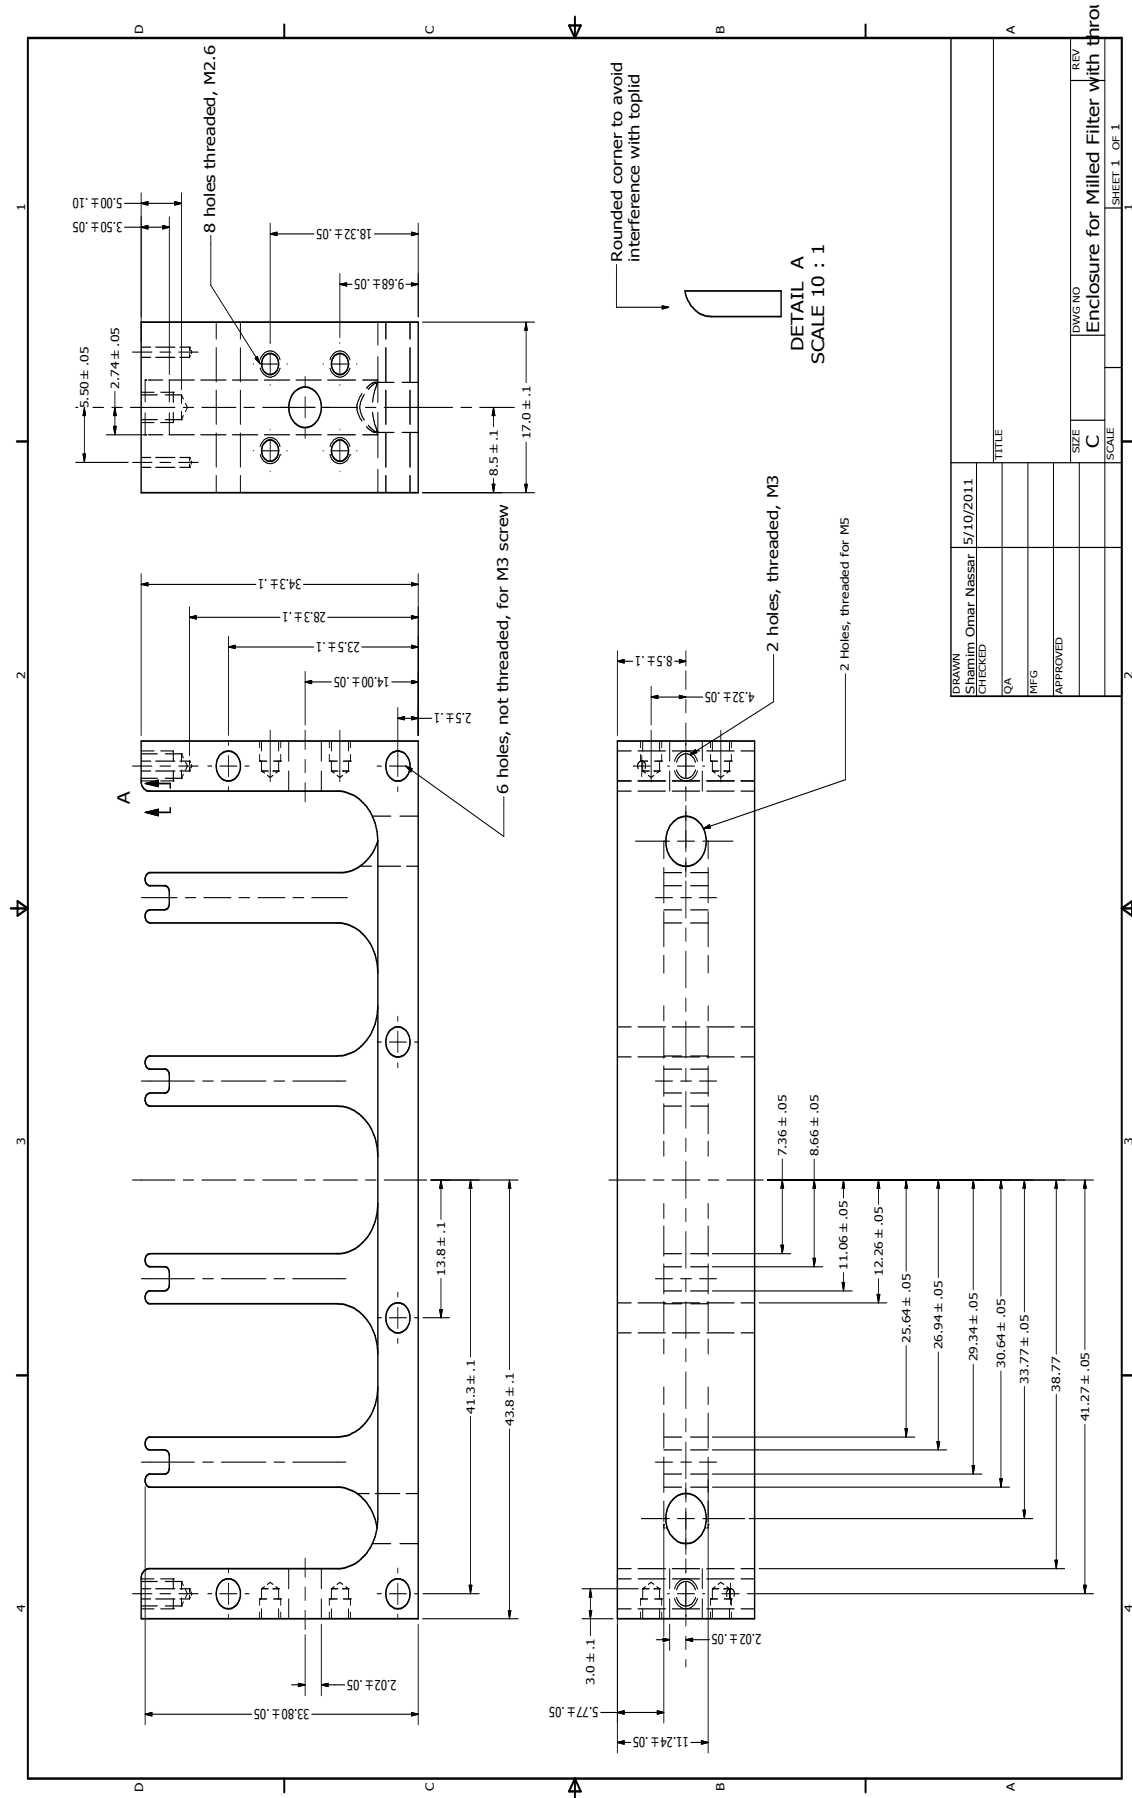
1.3GHz Combine Filter Main Body Dimensions - Milling Option
